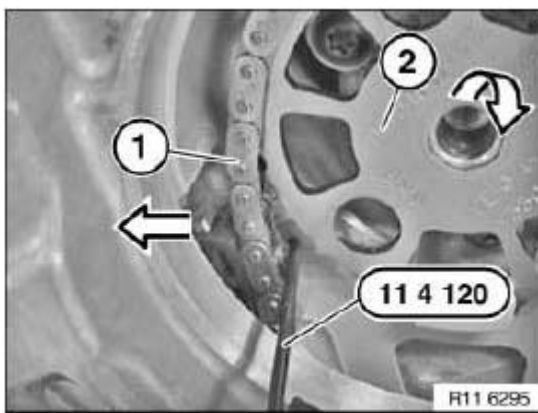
Identifying Special Tool (11 4 120), Chain Tensioner And Sprocket Wheel
